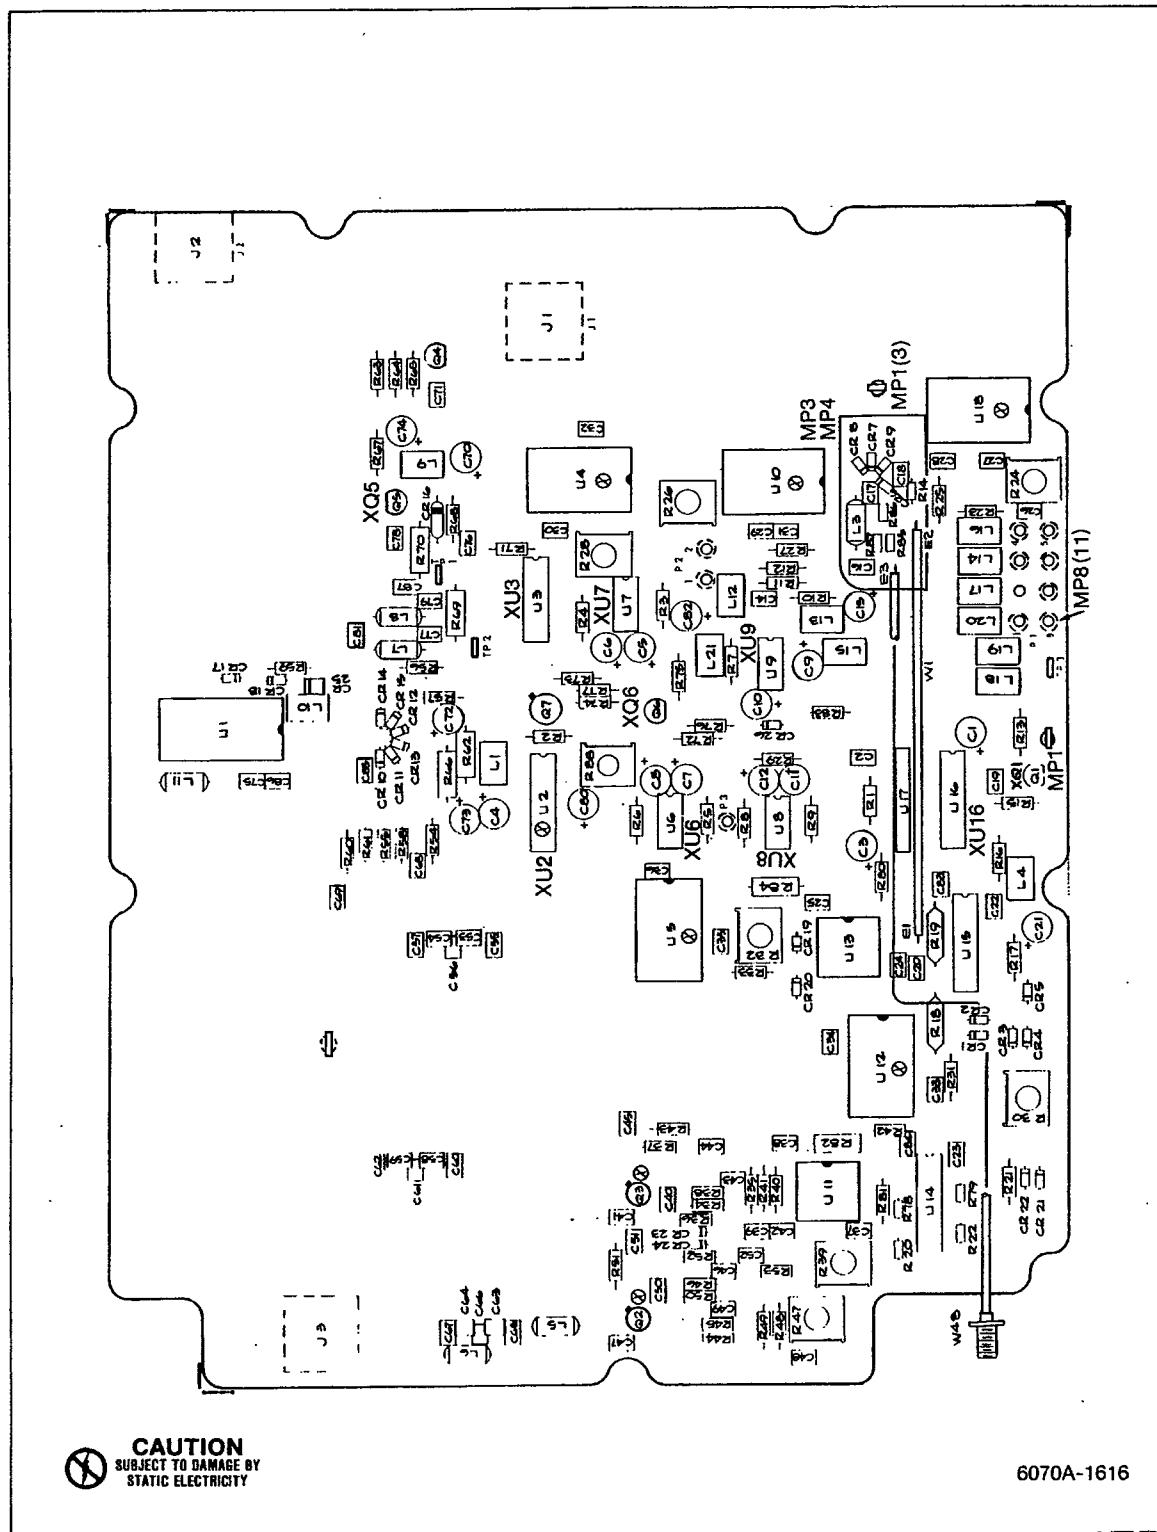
A4A4 Modulator Divider PCB Assembly
